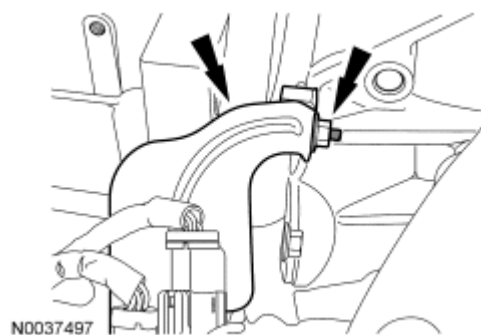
Locating Engine Wiring Harness Bracket And Nut
